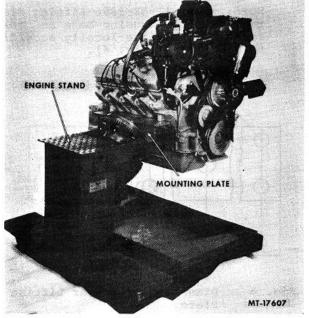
Engine Installed in SE-1962 Overhaul Stand with Mounting Plate
